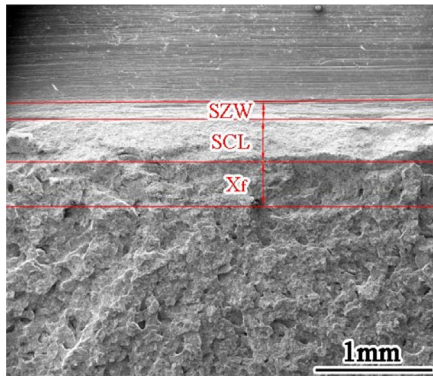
Macro-fracture surfaces of the lower testing temperature.
